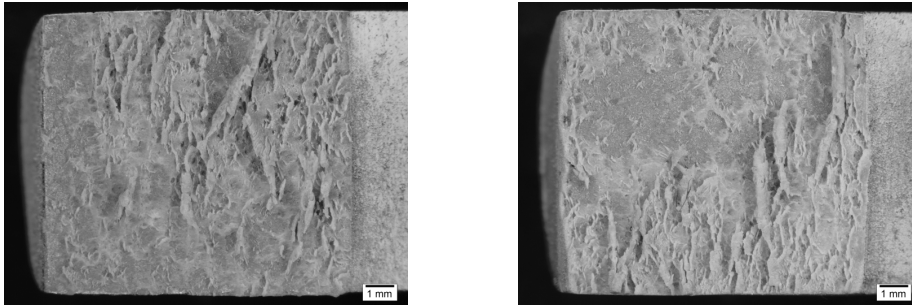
Fracture surface of a representative lap shear specimen.
